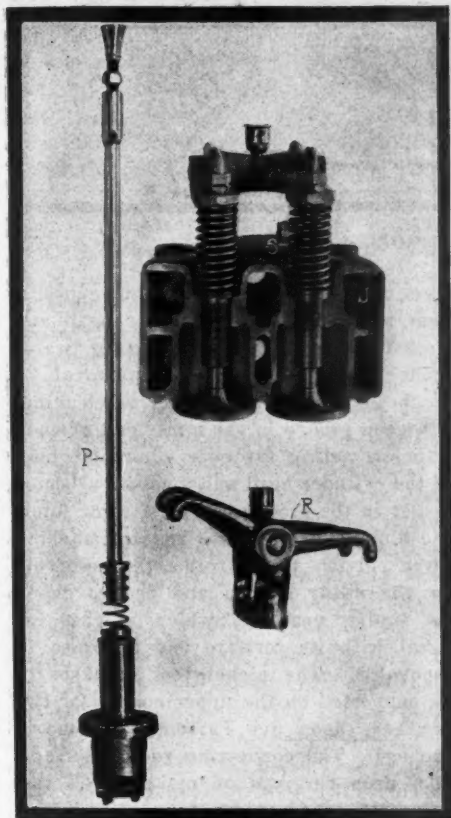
THE KNOX OVERHEAD VALVE MECHANISM
